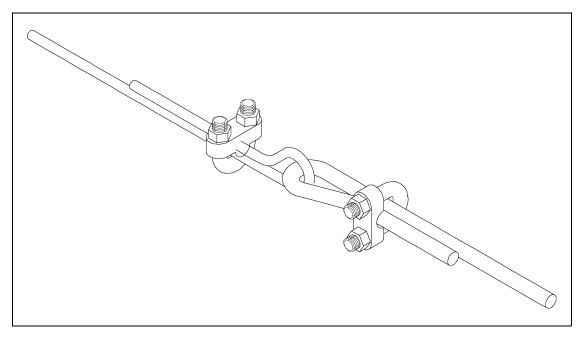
Q Cable-to-Cable or Cable-to-Rod Connections
